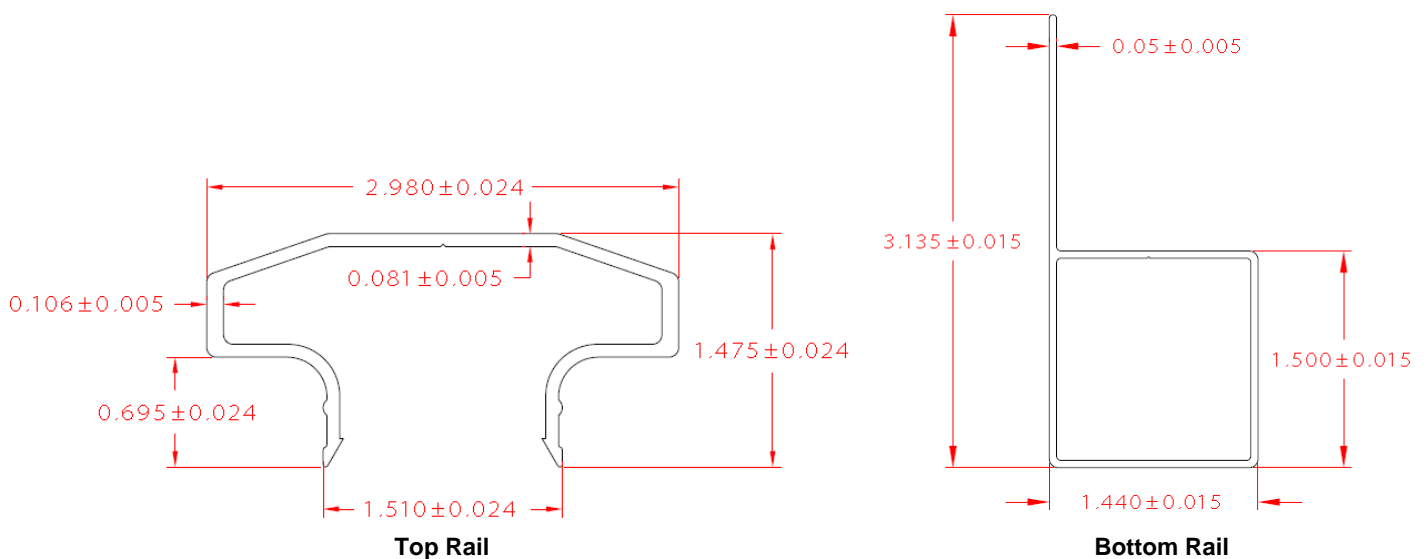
ALUMINUM TOP AND BOTTOM RAIL INSERTS (dimensions in inches)
